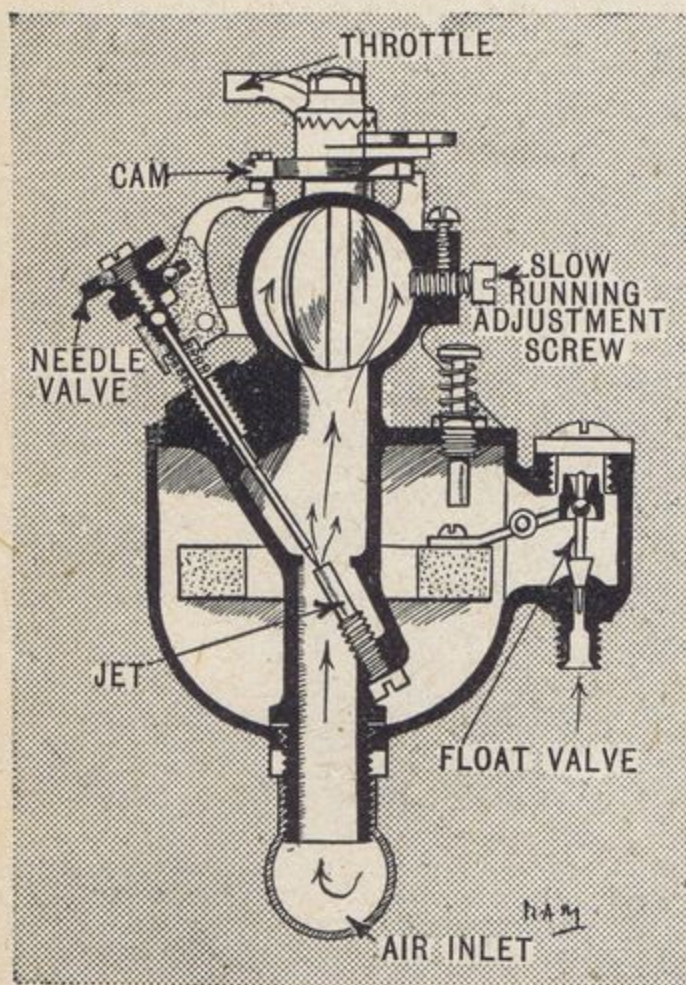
SECTIONAL VIEW OF THE SCHEBLER CARBURETTER.
